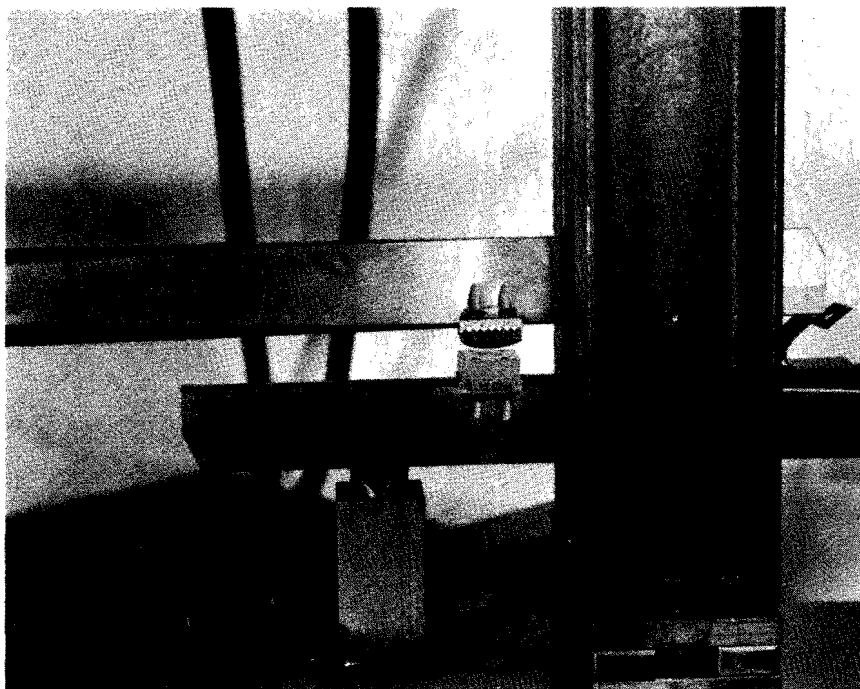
Close-up View of Sonotrode Tips on Double Opposed Ultrasonic Welding Test System
